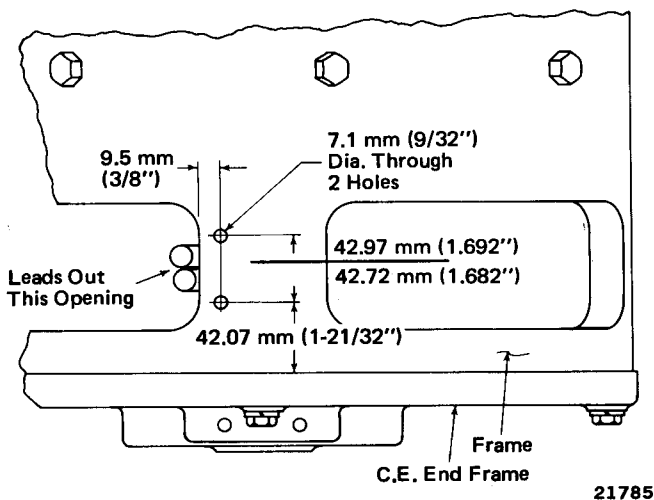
Dynamic Brake Fan Motor New Lead Clamp Hole And Cable Cleat Location
